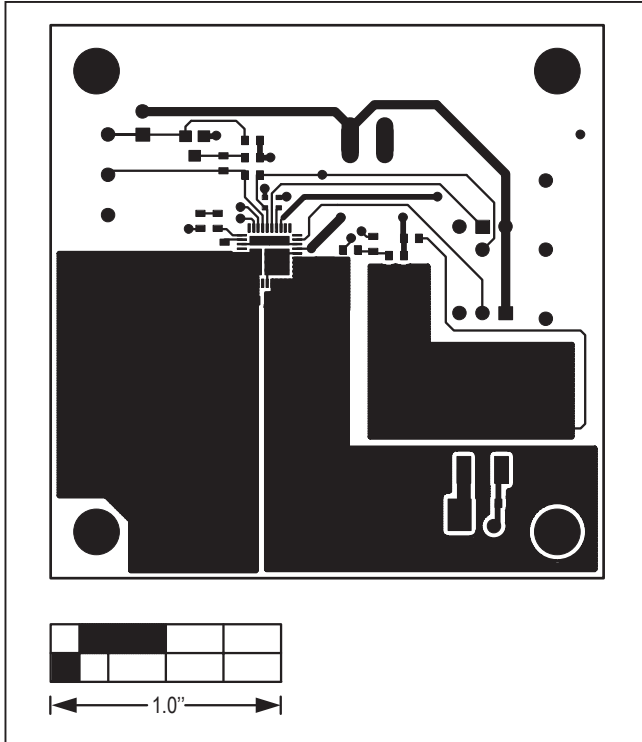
MAX17016 EV Kit PCB Layout—Solder Side
